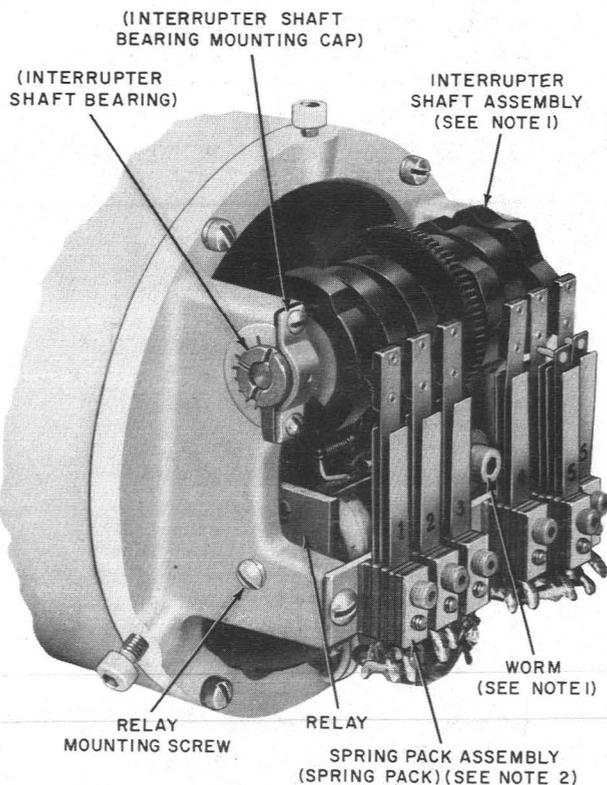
KS-15985 Type Ringing Machine—Electronic Specialty Co.—Interrupter Shaft Assembly Furnished as a Unit (KS-15985 L1 AC Machine Shown)
